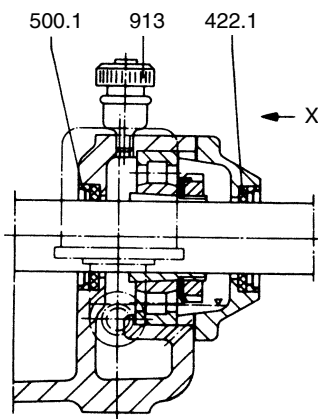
Construction with constant level oiler and sealing of the bearing housing.
